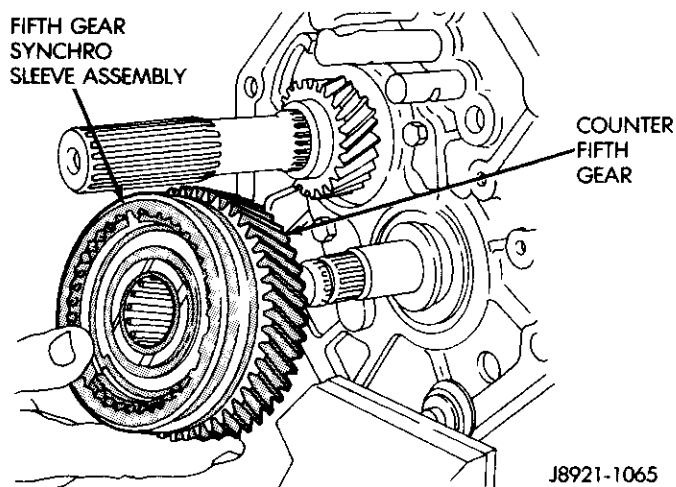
Removing Counter Fifth Gear And Synchro Assembly
